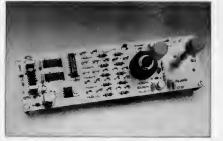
Completed PCB before installetion in the enclosure. Note that a duel-pointer knob is titted on the spindle of the tuning cepacitor.
